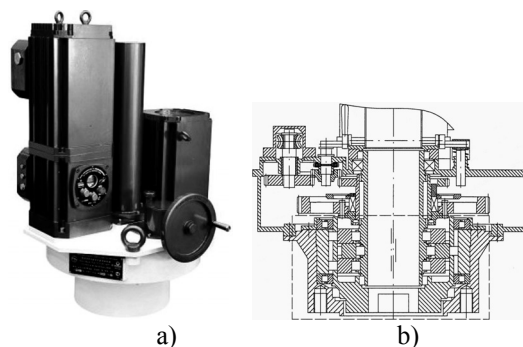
General view (a) and design arrangement (b) of multi-turn drive with parallel positioned axes of engine rotor and valve spindle produced by "Tomzel" (Russia)
